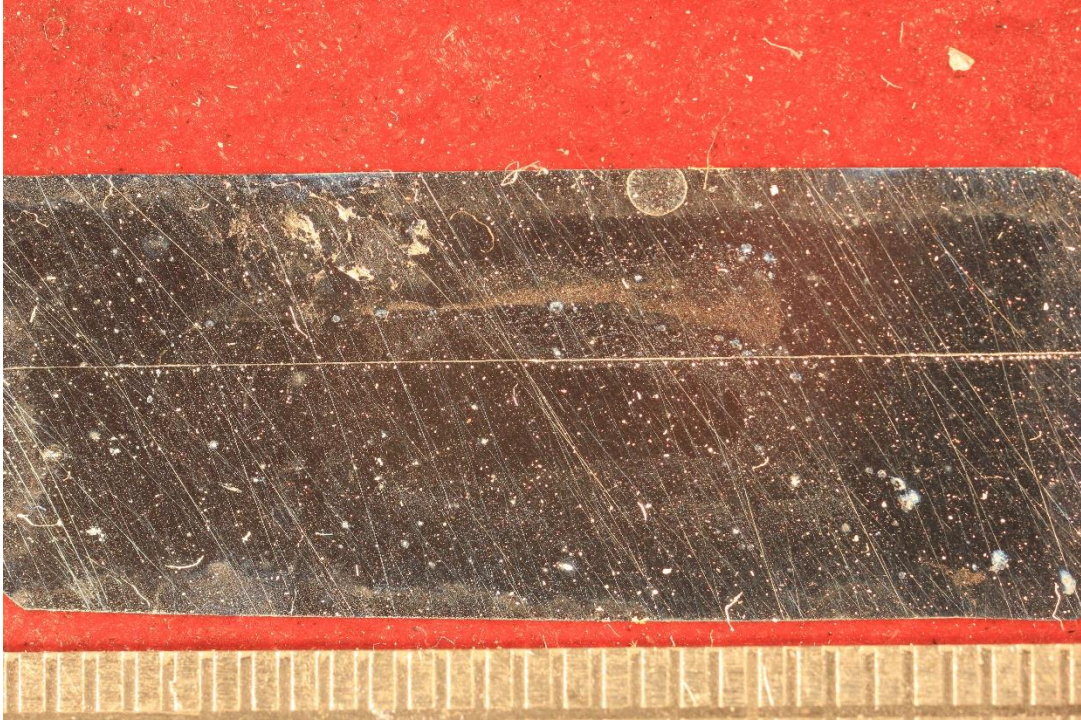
Macrograph of Weld 6 Sample 1
